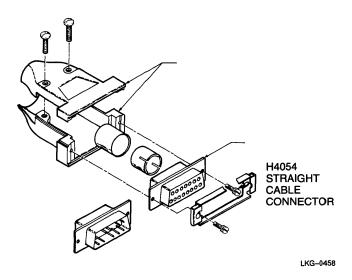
H4054 Transceiver Cable Straight Connector Kit
